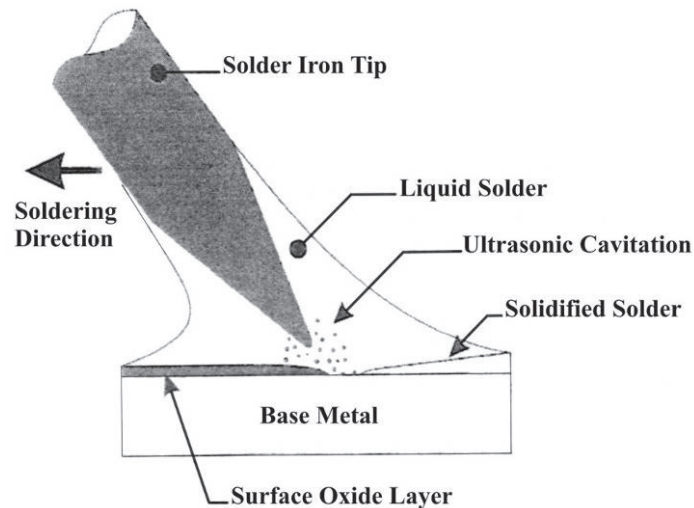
Ultrasonic cavitation removing surface oxide and wetting solder. [133]
